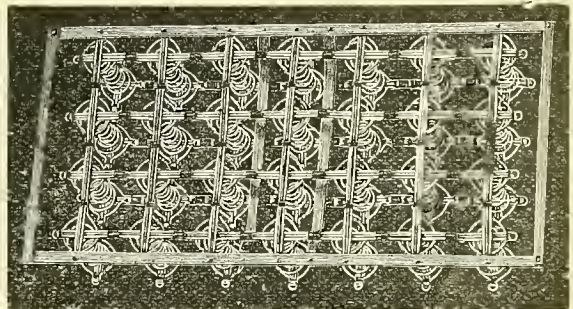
SPRING EDGE CUSHION SPRINGS.
